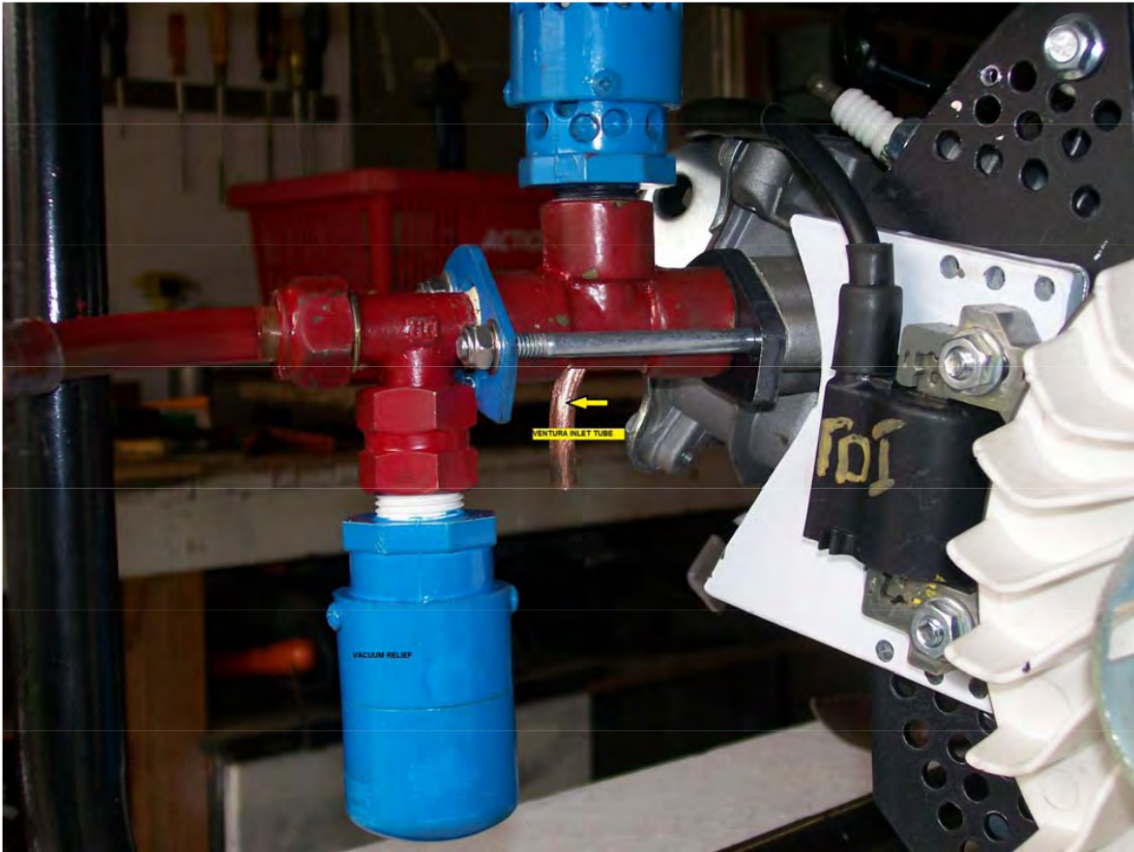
Assembly of pipes, backing plate, pressure-relief, vacuum-relief, gaskets, nuts and bolts.
